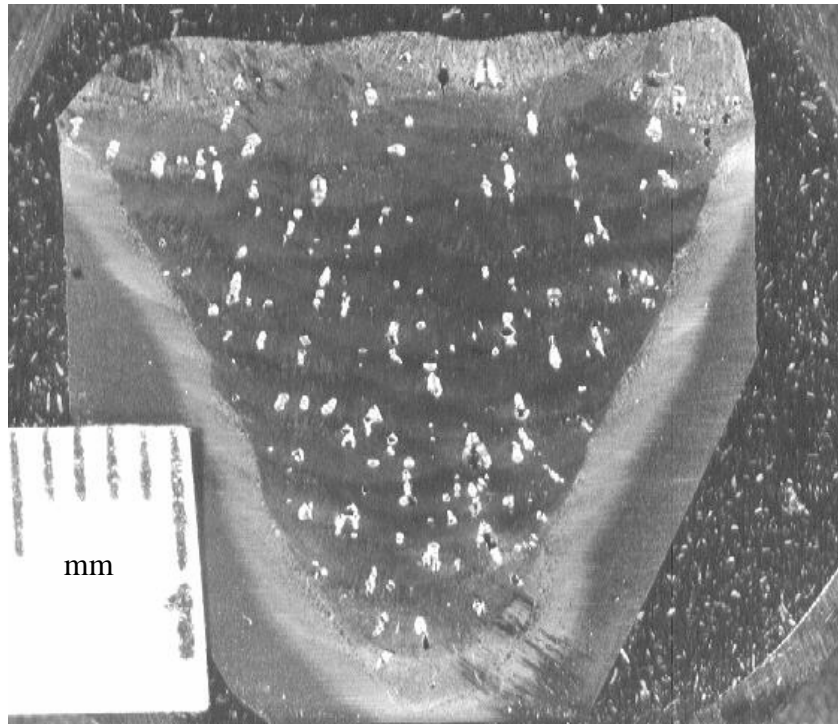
Macro-section and top bead microstructure from 3R1 V-groove weld.
